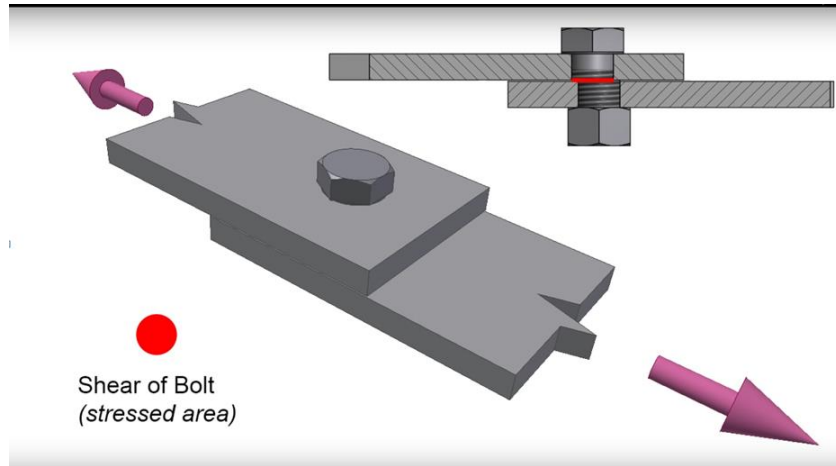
Bolt Failure (moodlemech, 2019)
